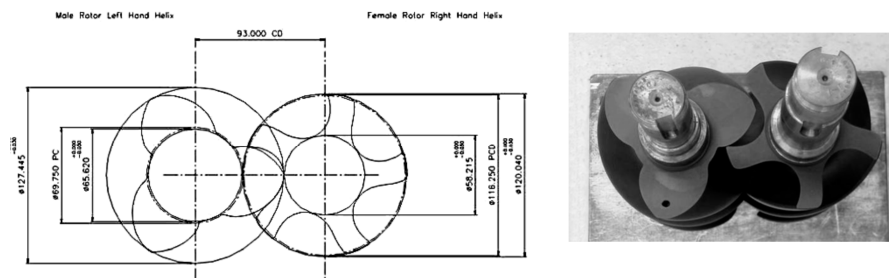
Oil free screw compressor with 3-5 “N” rotors
